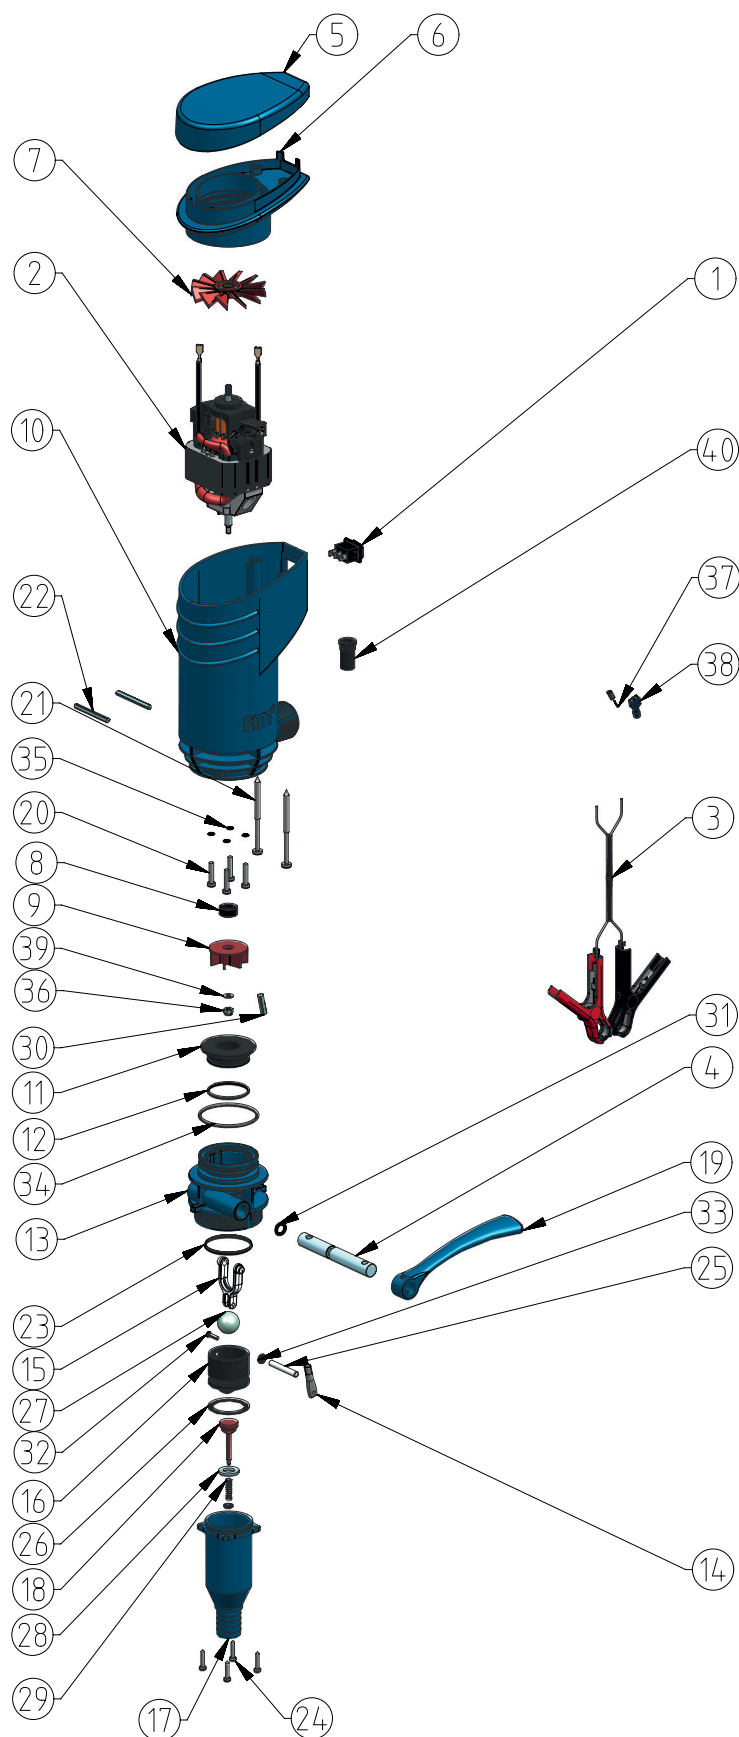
1: Exploded view of the PREMAxx DEF axial gear pump 12 V
